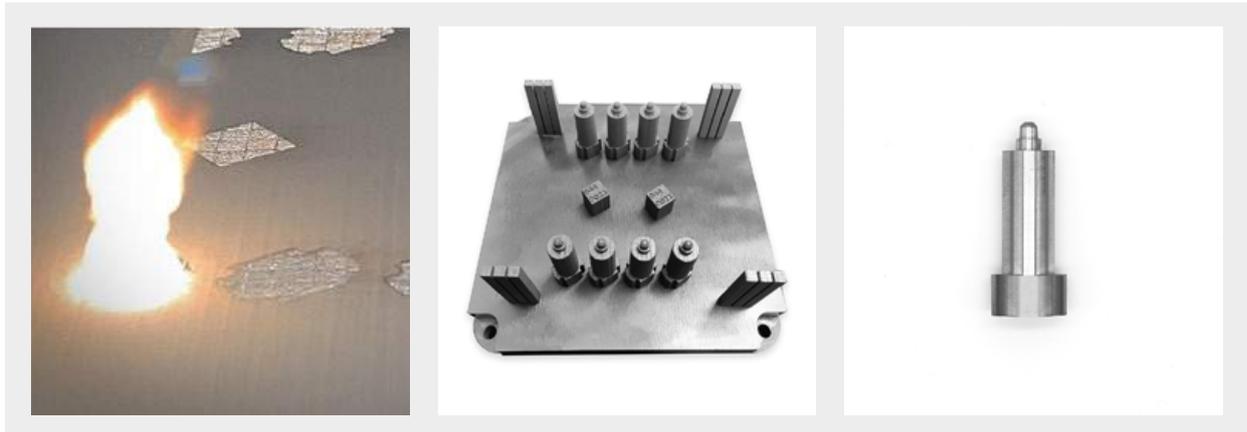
Left; Area Printing in progress to form one of the steel core pins for an injection mould tool that will be used to manufacture brackets for aerospace and defence customer United Aircraft Technologies. Centre; Eight core pins (four in the front, four in the back) with tensile bars and test cubes also on the build plate. Right; the finished part, a single core pin, built in 316L stainless steel
